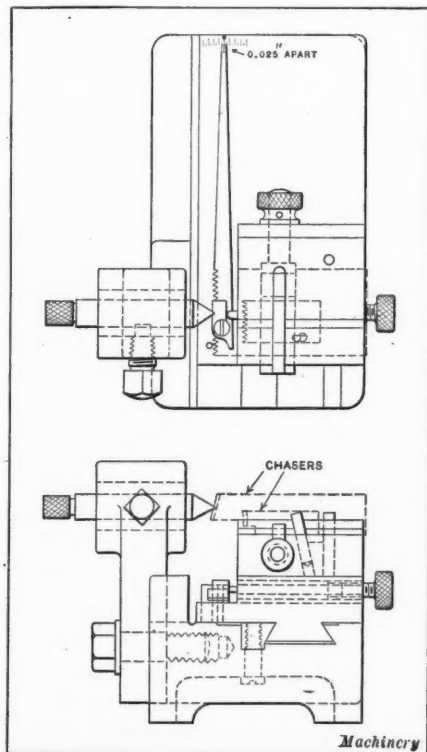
Fixture for testing Straightness of Opening Die Chasers
